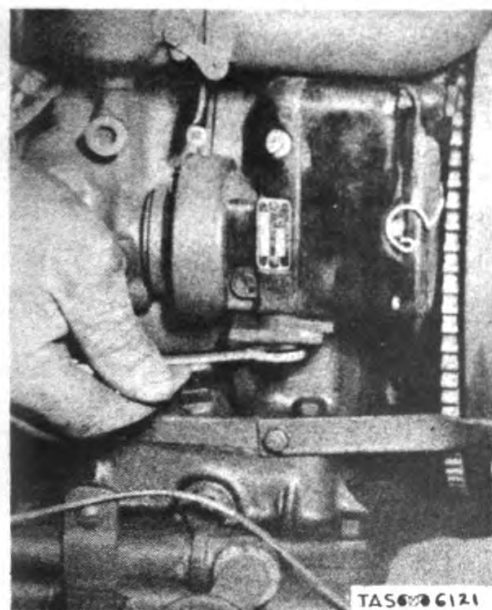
Removing Magneto Mounting Cap Screws Holding Nut to Base of Engine Carburetor.
